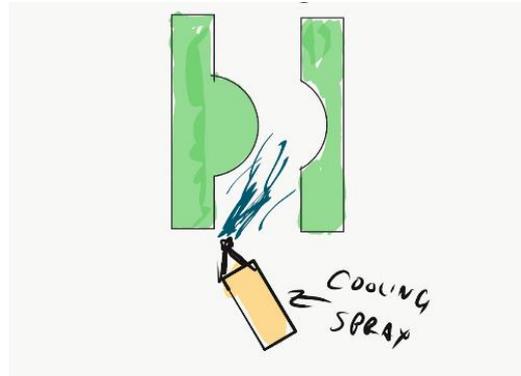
Concept 1: Cooling spray used to cool the injection mold.
